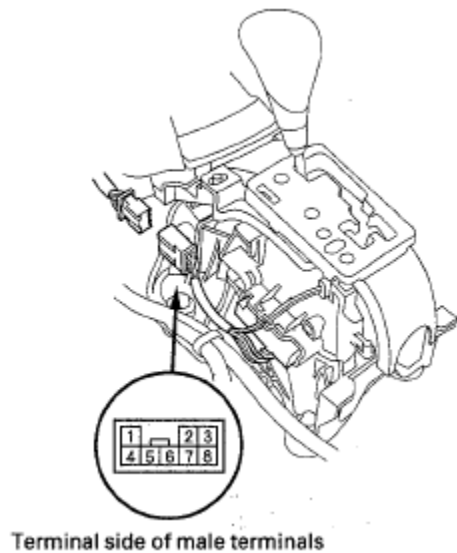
Identifying A/T Gear Position Indicator Panel Light Connector
